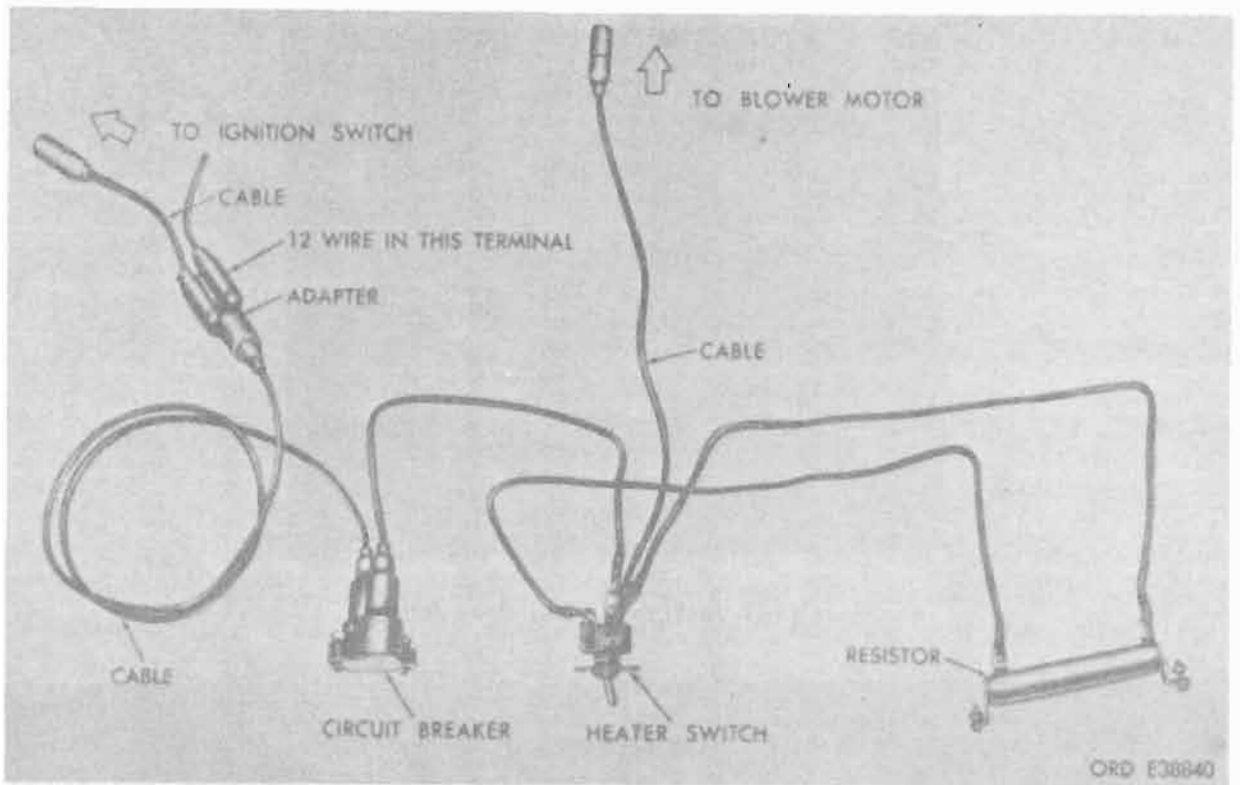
Circuit breaker, heater switch, resistor, and cables relative location.
